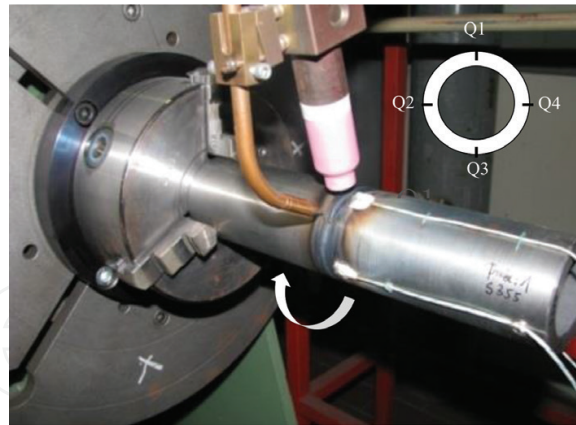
TIG welding of the tubular specimens with temperature measurements [8].
